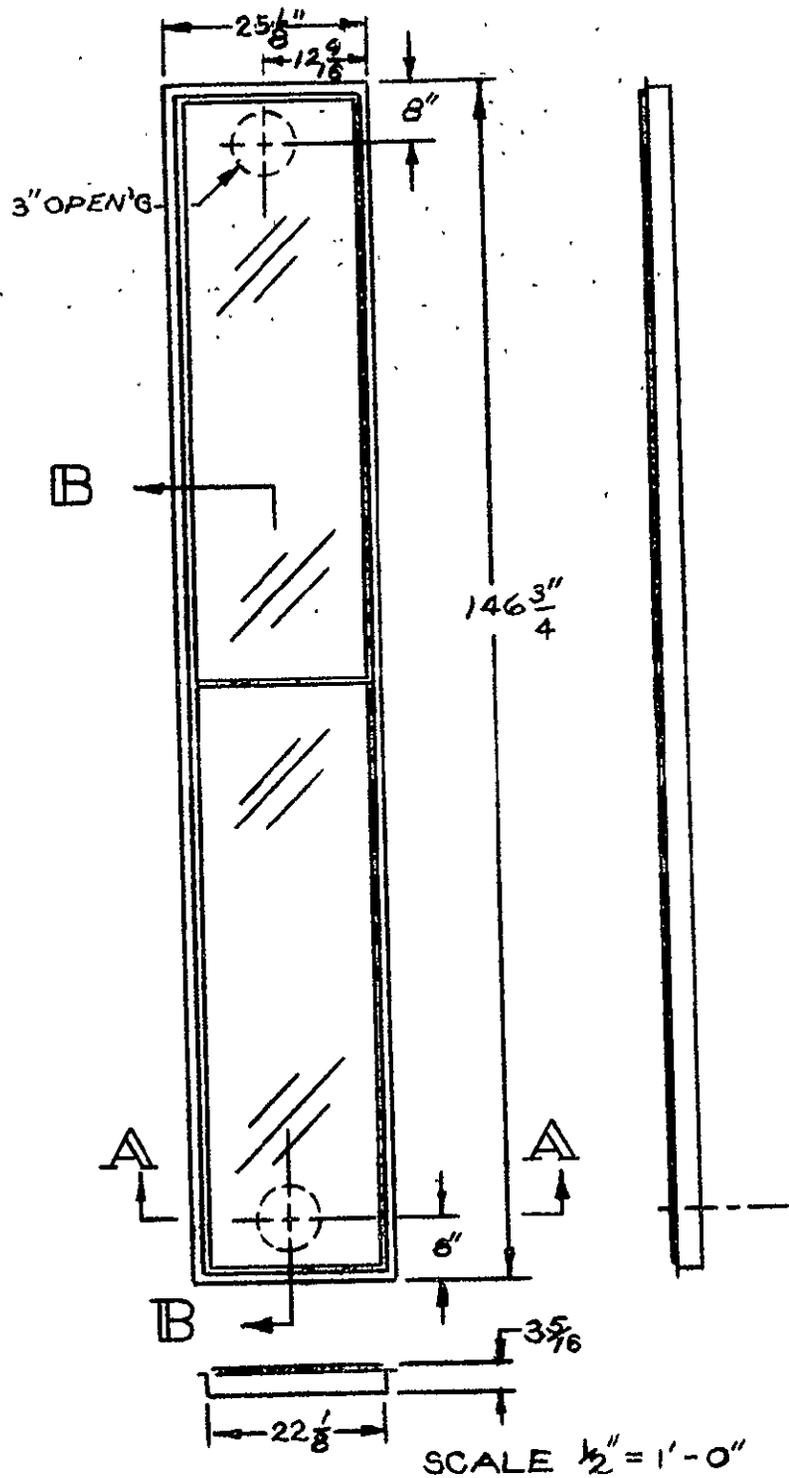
PLAN AND SECTIONAL VIEWS OF SEPCO COLLECTOR
